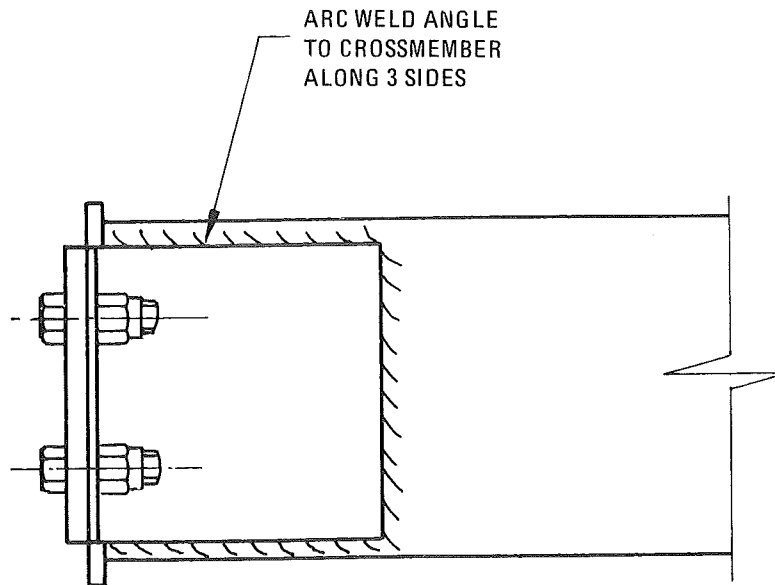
METHOD OF WELDING TO CHASSIS PLATE
